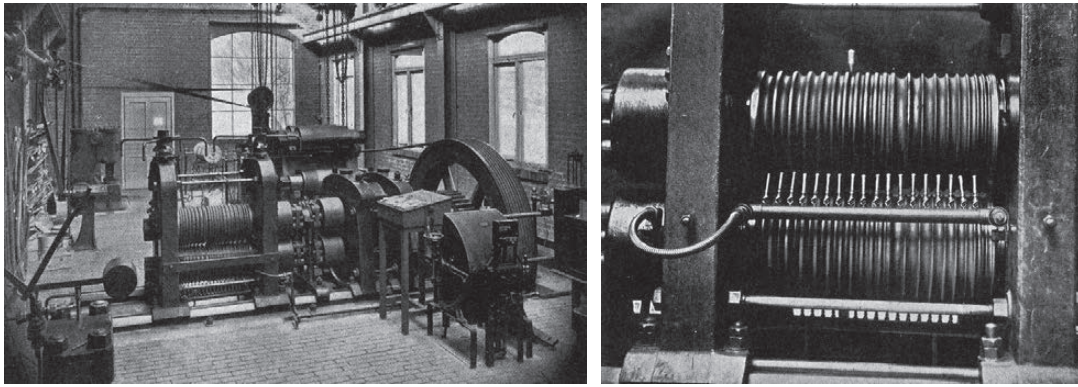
Grooved rolling mill at National Physical Laboratory (left), and gas-burners for pre-heating grooved roll⁴⁾.
